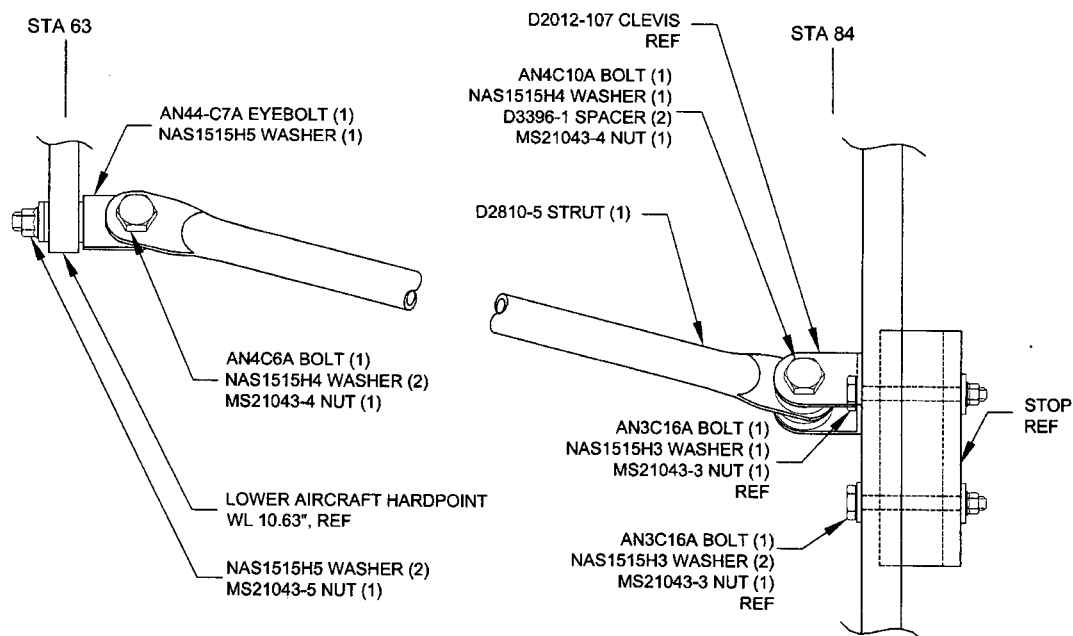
Strut Detail for D412-630-033/-034 *Heli-Access-Step*™ Installation
